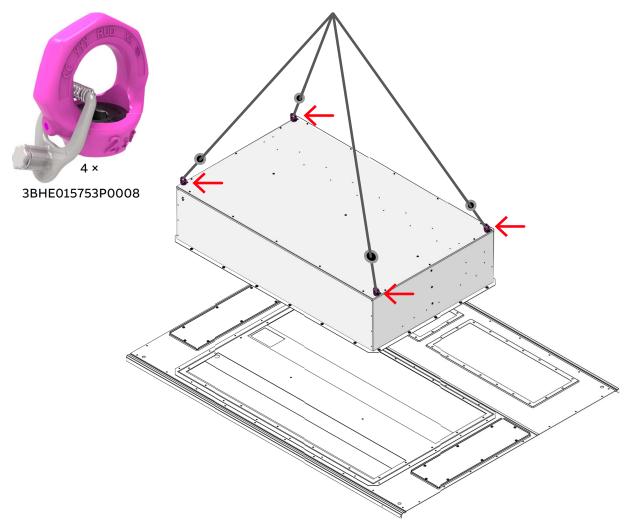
Lifting a cooling unit (example with IP54 unit)
